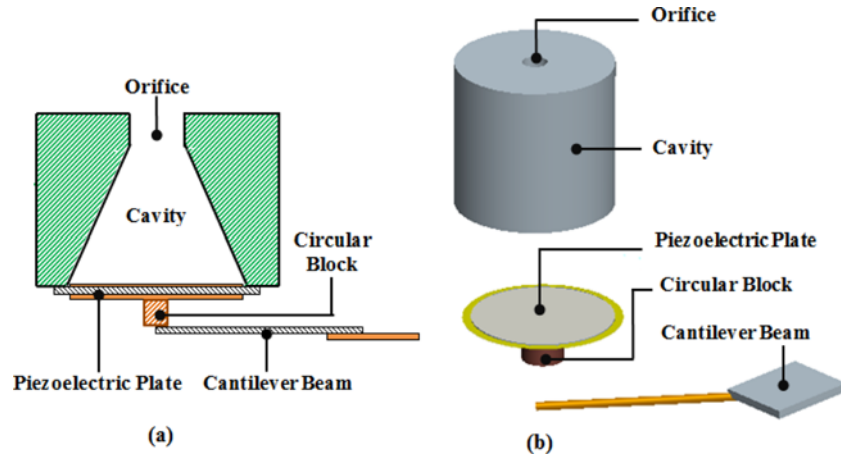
Developed AEH (a) cross-sectional view and (b) exploded view
